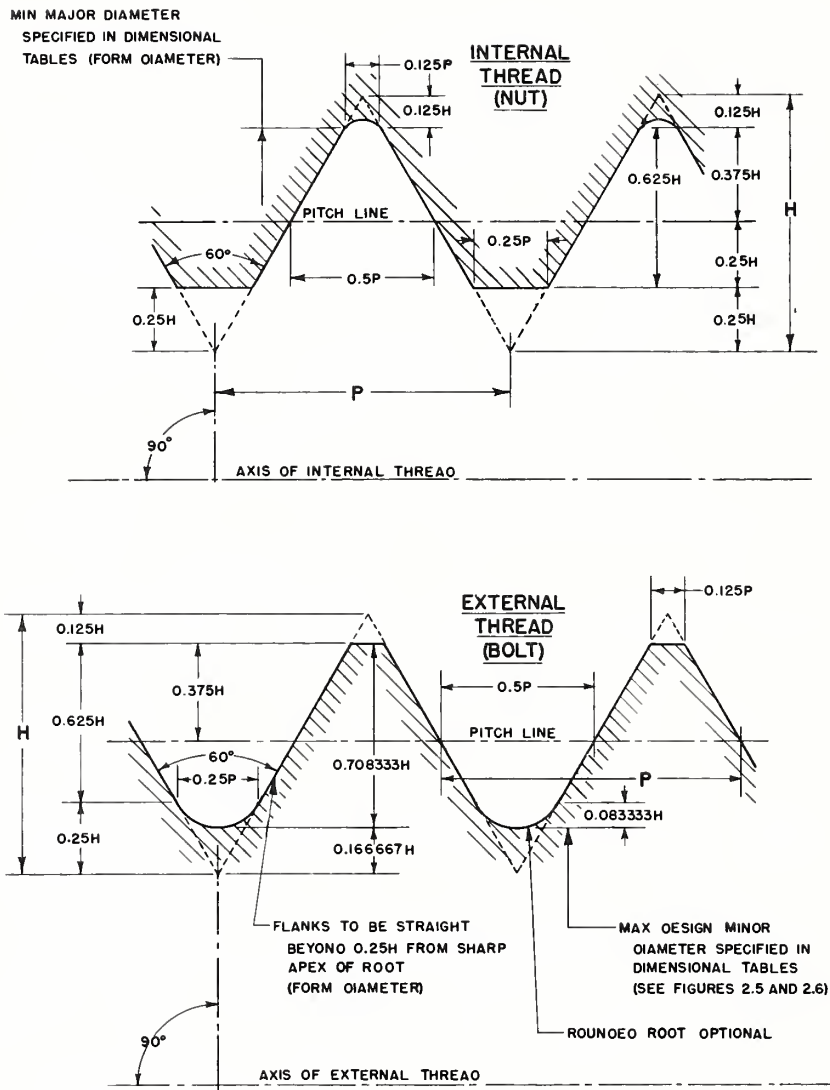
Unified internal and external screw thread design forms (maximum material condition).
